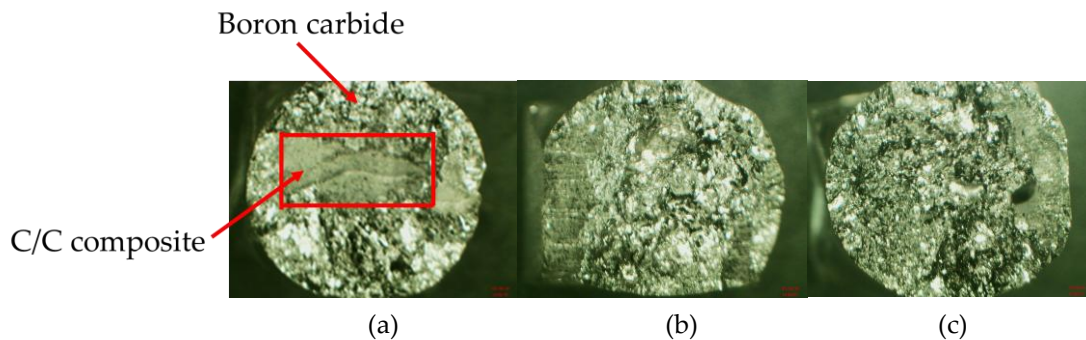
Cross section of each test piece after fracture: (a) Pure B₄C ; (b) B₂O₃ acid added ; (c) Flux applied
